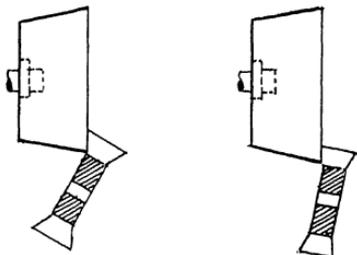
Changing clearance angle by swiveling the cutter in a vertical plane.
